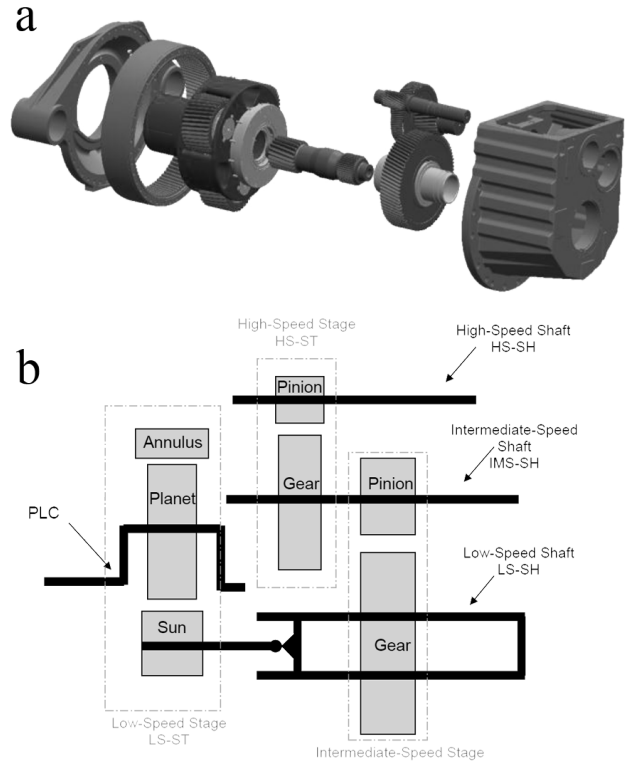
(a) View of internal components of the test gearbox. (b) Internal nomenclature and abbreviations of the test gearbox.
